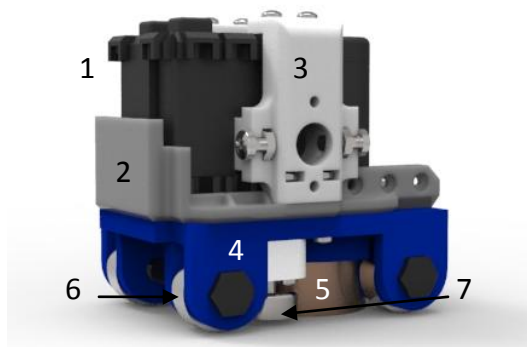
Base, with AX-12 (1), *Robotis* kit part (2), axle holder (3), magnetic support (4), switchable magnet (5), bearing (6) and permanent magnet (7).
